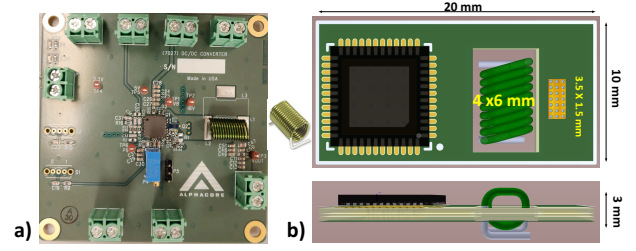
a) Fabricated testing board with inductor; b) Assembly showing low-profile of the complete DC-DC converter.
